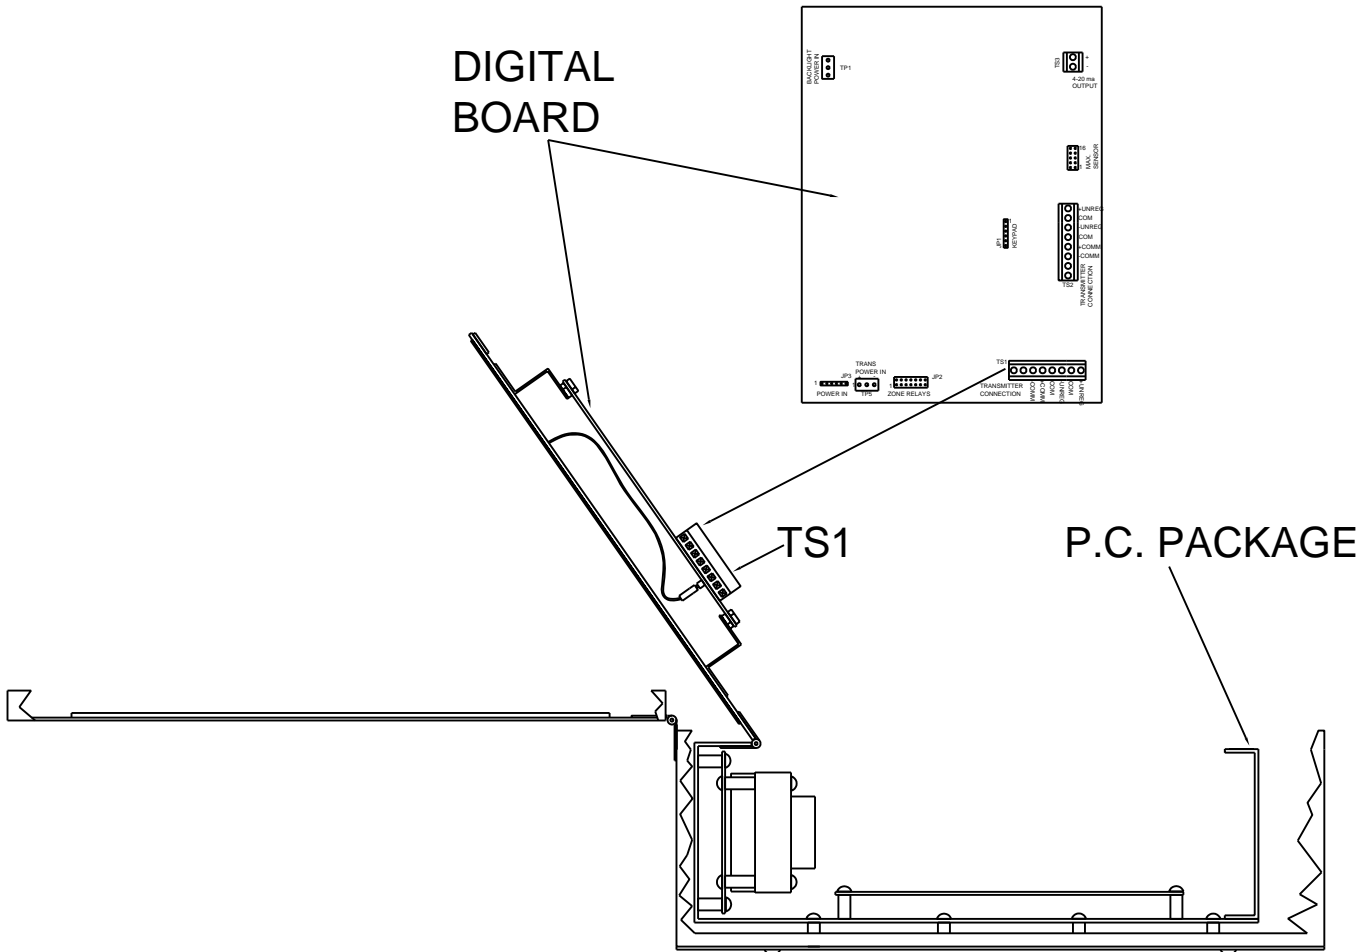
GDCP-A internal bottom view with cabinet door and P.C. package door open, indicating location of Digital P.C. board.
